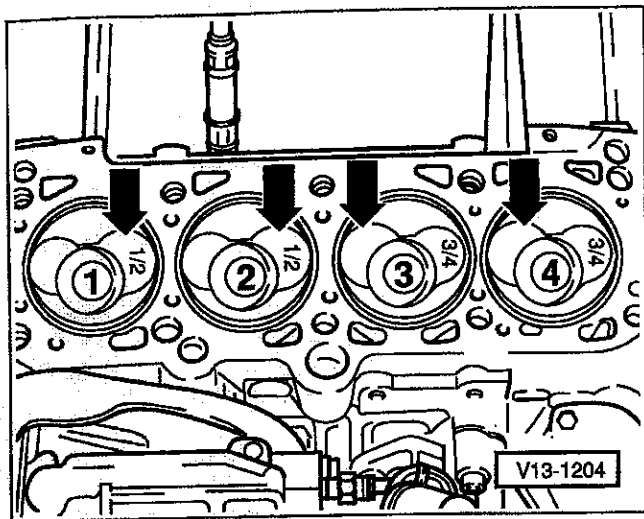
Piston orientation in ALH engine. Intake valve relief pocket is larger and points toward flywheel for cylinders 1 and 2 and toward pulley side for cylinders 3 and 4 (arrows). Pistons are factory marked for proper location.
